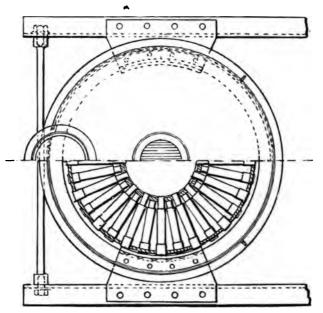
Robertson heavy-freight steam vehicles. Sectional plan of boiler.
